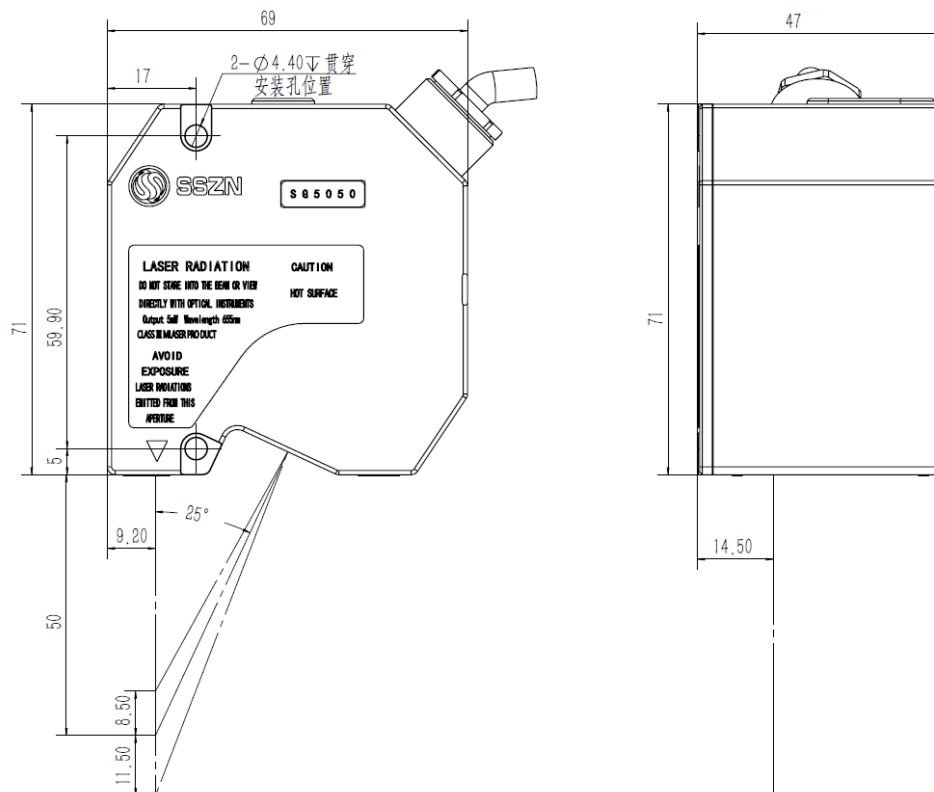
SG5050/5 Sensor Head dimensional diagram Unit (mm)
